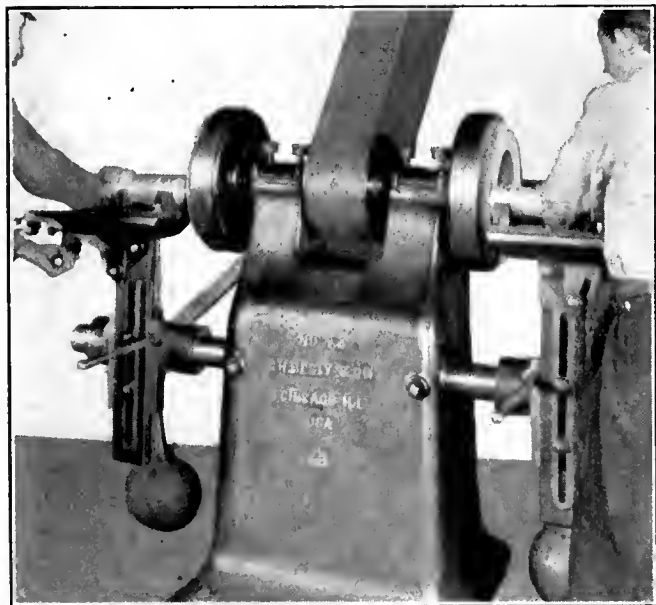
GRINDER WITH WATER HOODS AND PIPING REMOVED.
